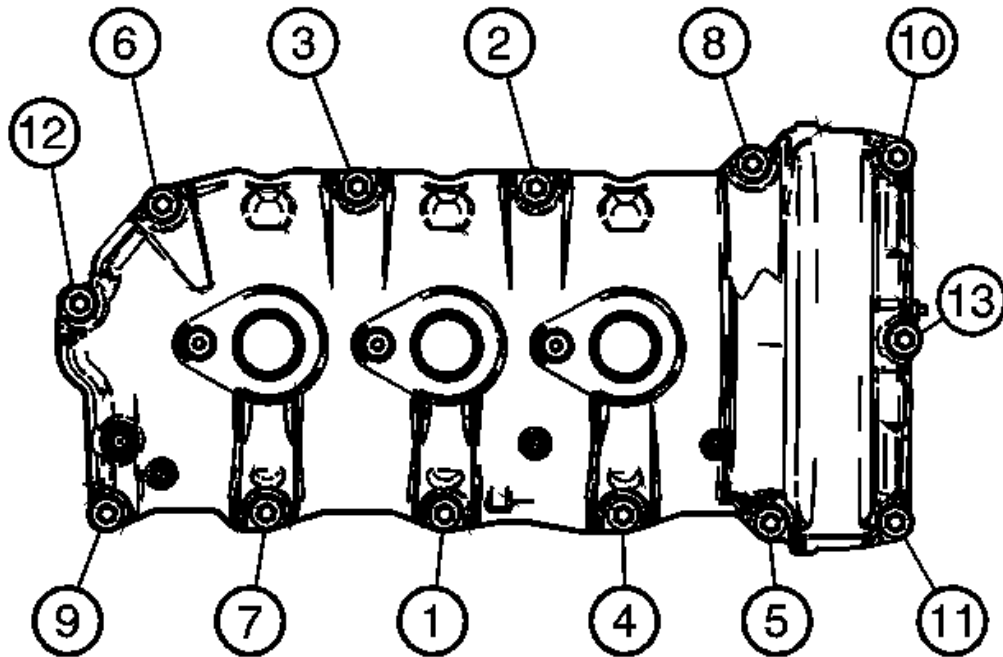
Identifying Tightening Sequence For Right Camshaft Cover Bolts
